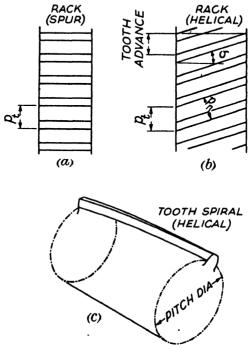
(a) RACK FOR SPUR GEAR, (b) RACK FOR HELICAL GEAR, (c) TOOTH SPIRAL ON HELICAL PINION
